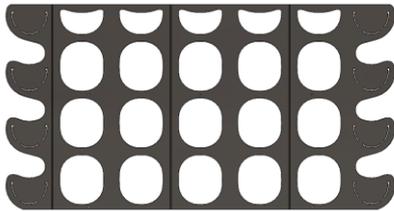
CAD Part - 0022-DE-CAD-005 - PLANTER STAND
